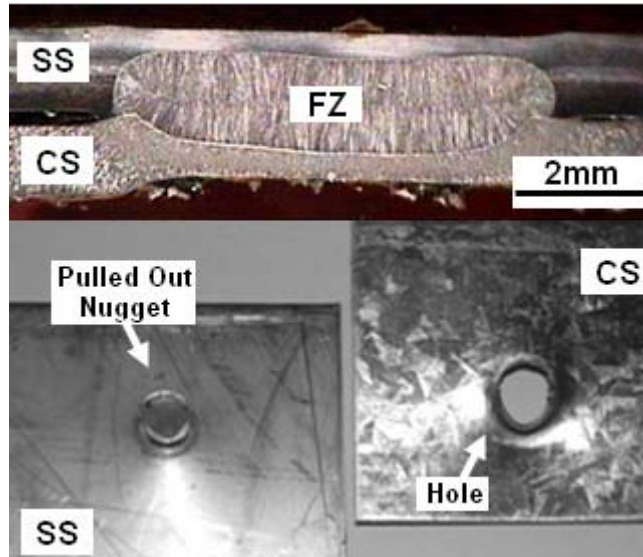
Macrostructure and fracture surface of dissimilar SS/CS RSW made at optimum welding conditions
